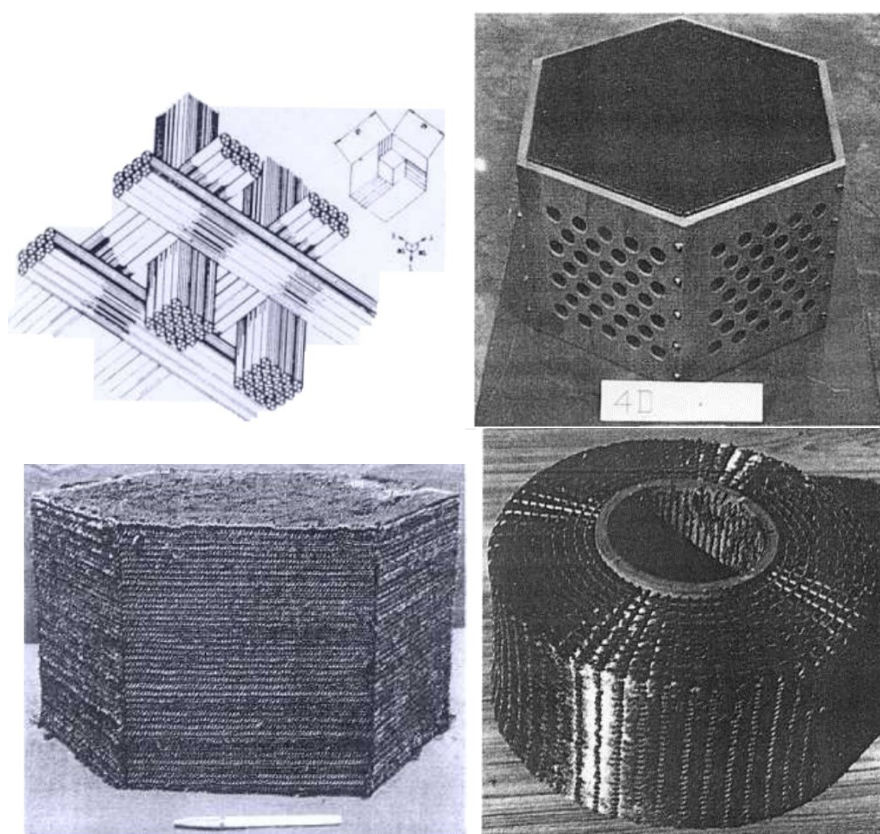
Different Carbon-Carbon Composites in their 3-D view.[5]
